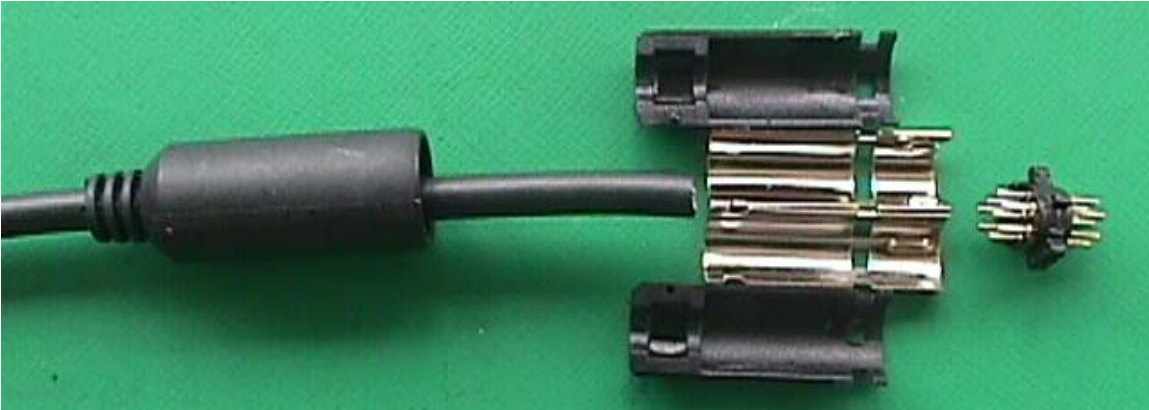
8-pin miniDIN male plug disassembled, showing the soft plastic cover pushed onto cable. The metal halves are inside the hard plastic halves. The join of the former is turned 90° to the latter. The halves are reassembled after the cable is soldered to the pins and tested. In the meantime, I suggest you coat the inside of the metal halves with a thin layer of protective lacquer in case the metal halves touch a conductor.
